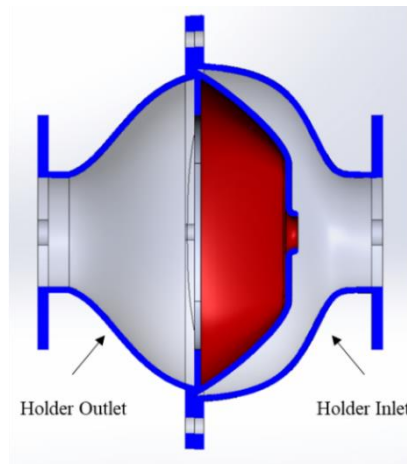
Cross-Sectional View of Earcup Holder Assembly
